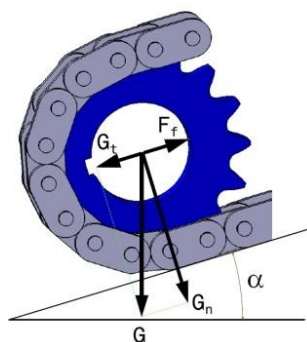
Static friction coefficient in chain-sprocket assembly.
